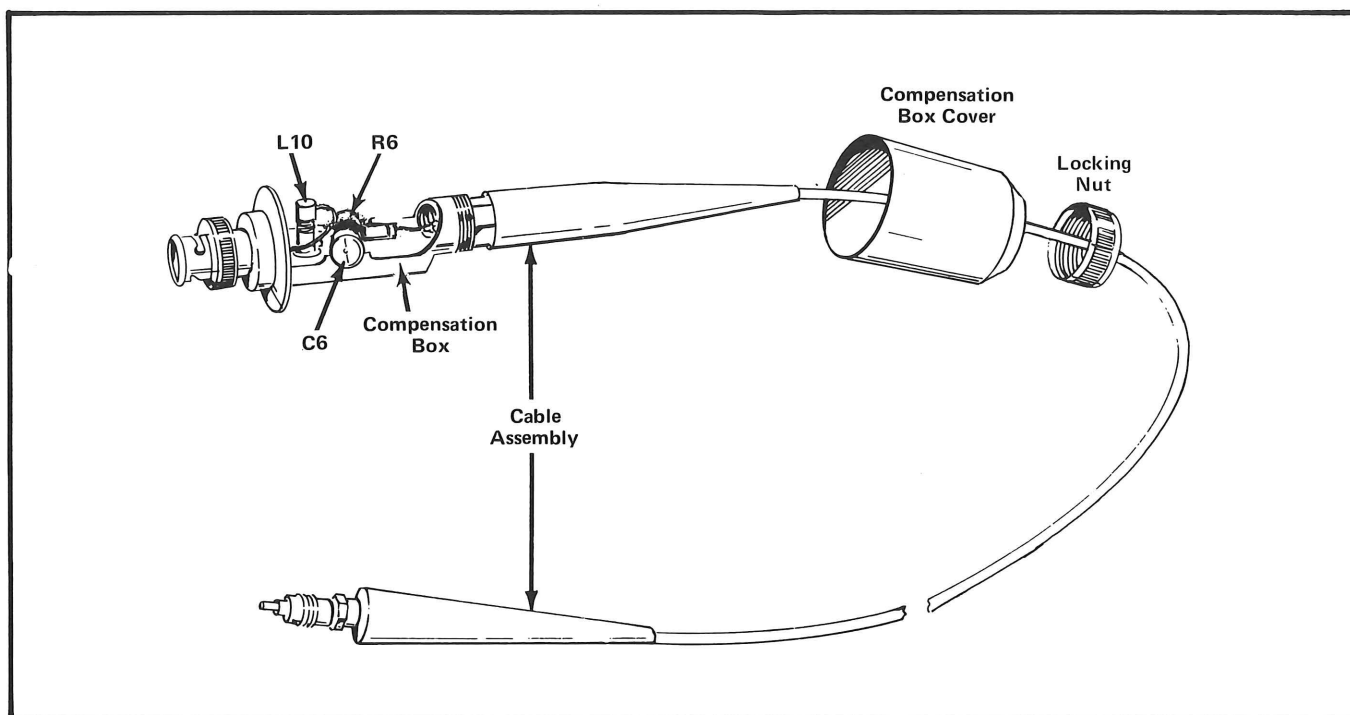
P6008 Probe Compensation Box Assembly.
